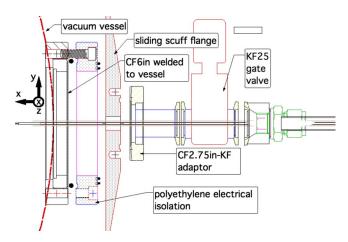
(Color online) Schematic two dimensional exploded assembly view of the RSX scuff probe positioner, with a sample probe inserted into the vacuum vessel.
